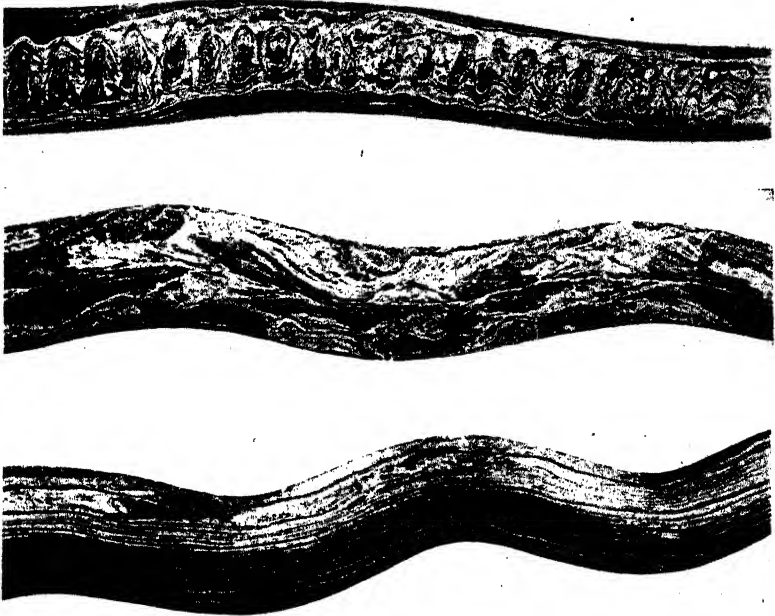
Early sword blades. The patterns are made by welding pieces of steel of different degrees of carbon and twisting, folding, and rewelding them in various ways. The best blades are said to contain from 4,000 to 4,000,000 layers in a thickness not more than $\frac{1}{4}$ in. After producing the layers, the steel is finished, polished, and etched with lime or lemon juices, or, more rarely, with acids. (Courtesy of George C. Stone.)
